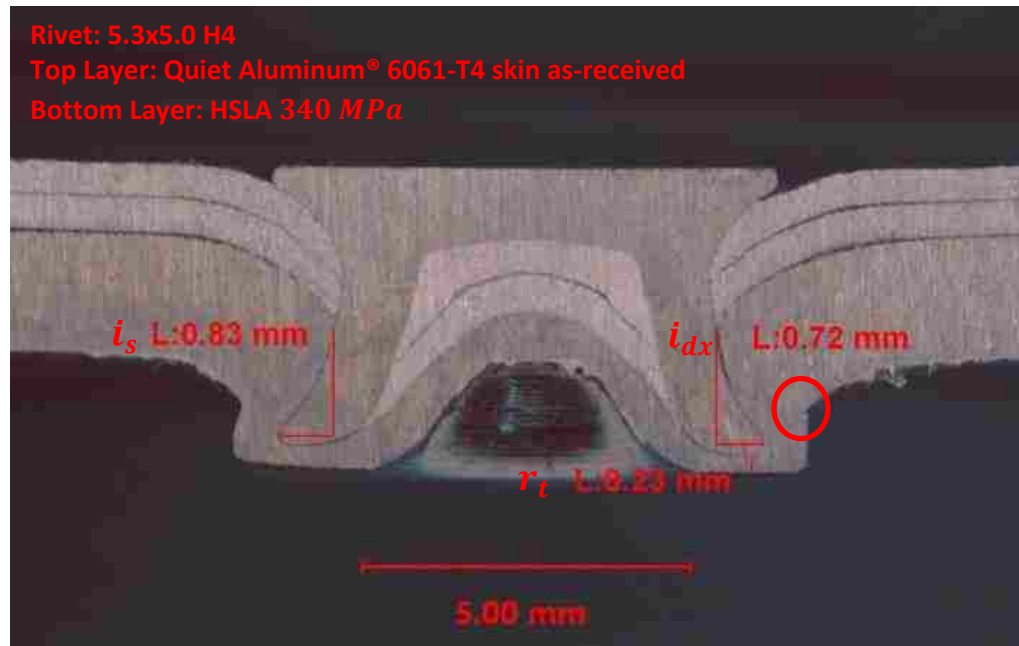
Microscope image on the cross section of the SPR joint with Quiet Aluminum® (6061-T4 skin as-received) and HSLA steel 340 MPa using die with tip and 5.3x5.0 H4 rivet. The measurements in red indicate the inspected parameters of the joint. Starting of a crack detected on the right side of the button (red circle).
